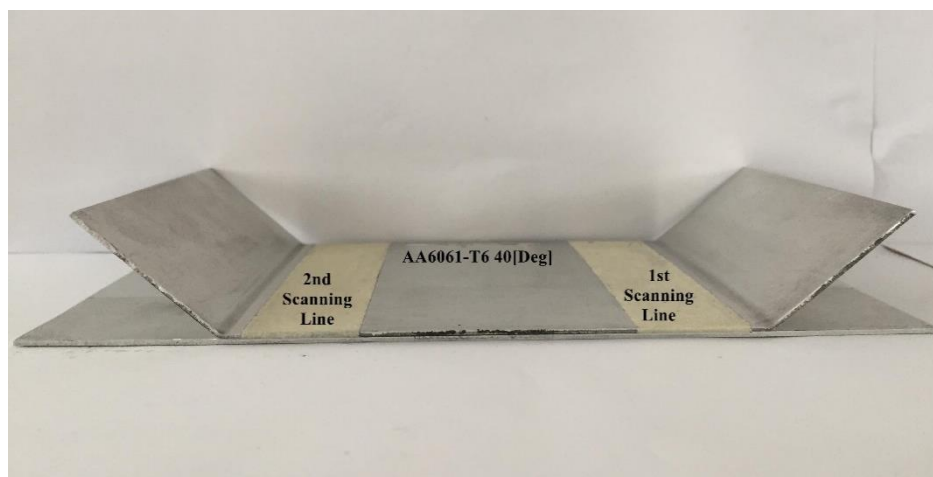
AA6061-T6 final formed “U” shape component with 40° bending angle
